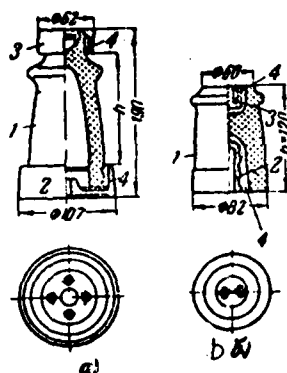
Stand-off insulators to voltage 10 kV for internal installation. a) type OA-10 with outside seal of armature (old construction/design); b) the type OMA-10 small/miniature with the internal seal of armature (new construction/design).
